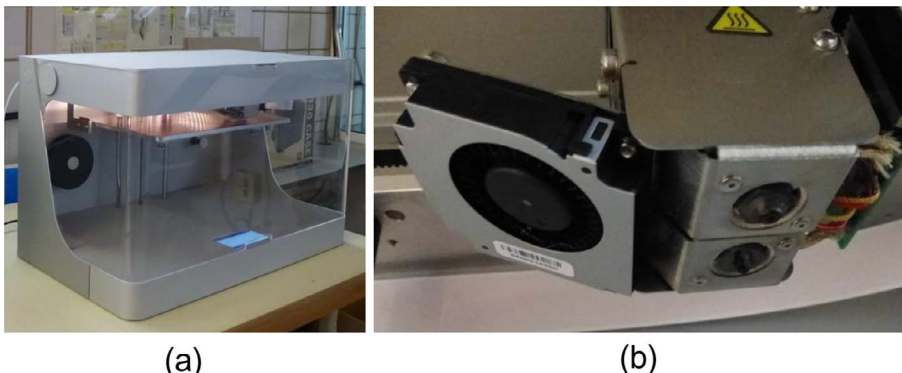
(a) General view of the 3D printer. (b) Detail view of the two printer injectors.
